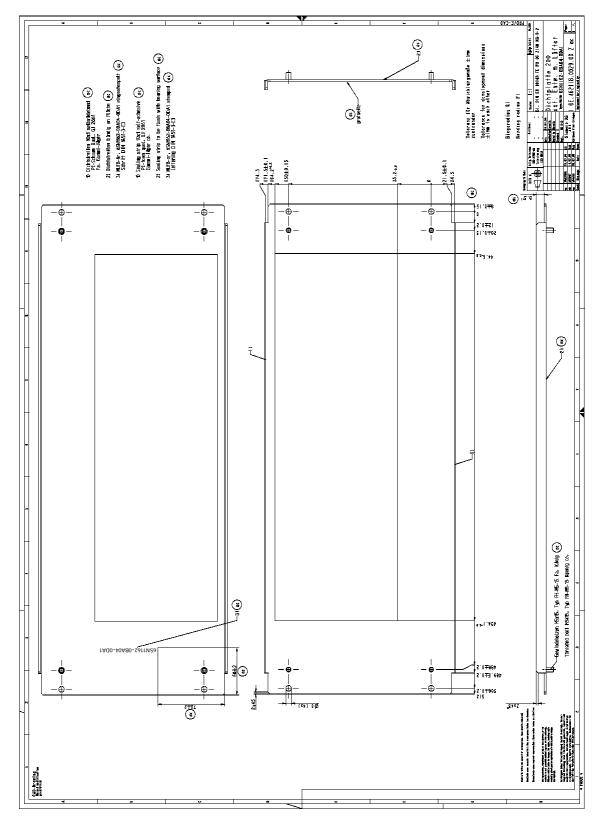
External cooling, mounting frame for cabinet installation module width 200 mm, 6SN1162-0BA04-0DA1
